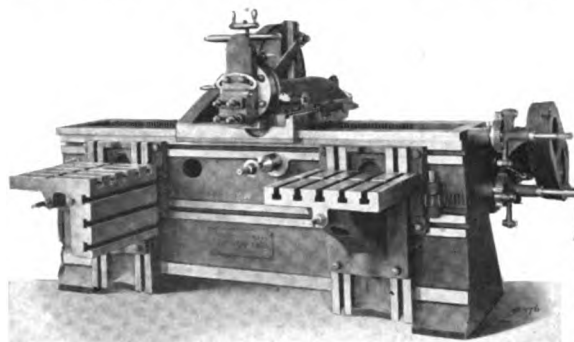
22" (559 mm.) Single Traveling Head Shaper
